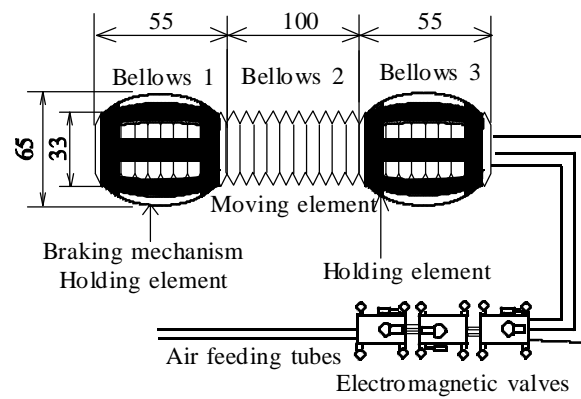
Structure of the fabricated mobile robot movable in different diameter pipes
